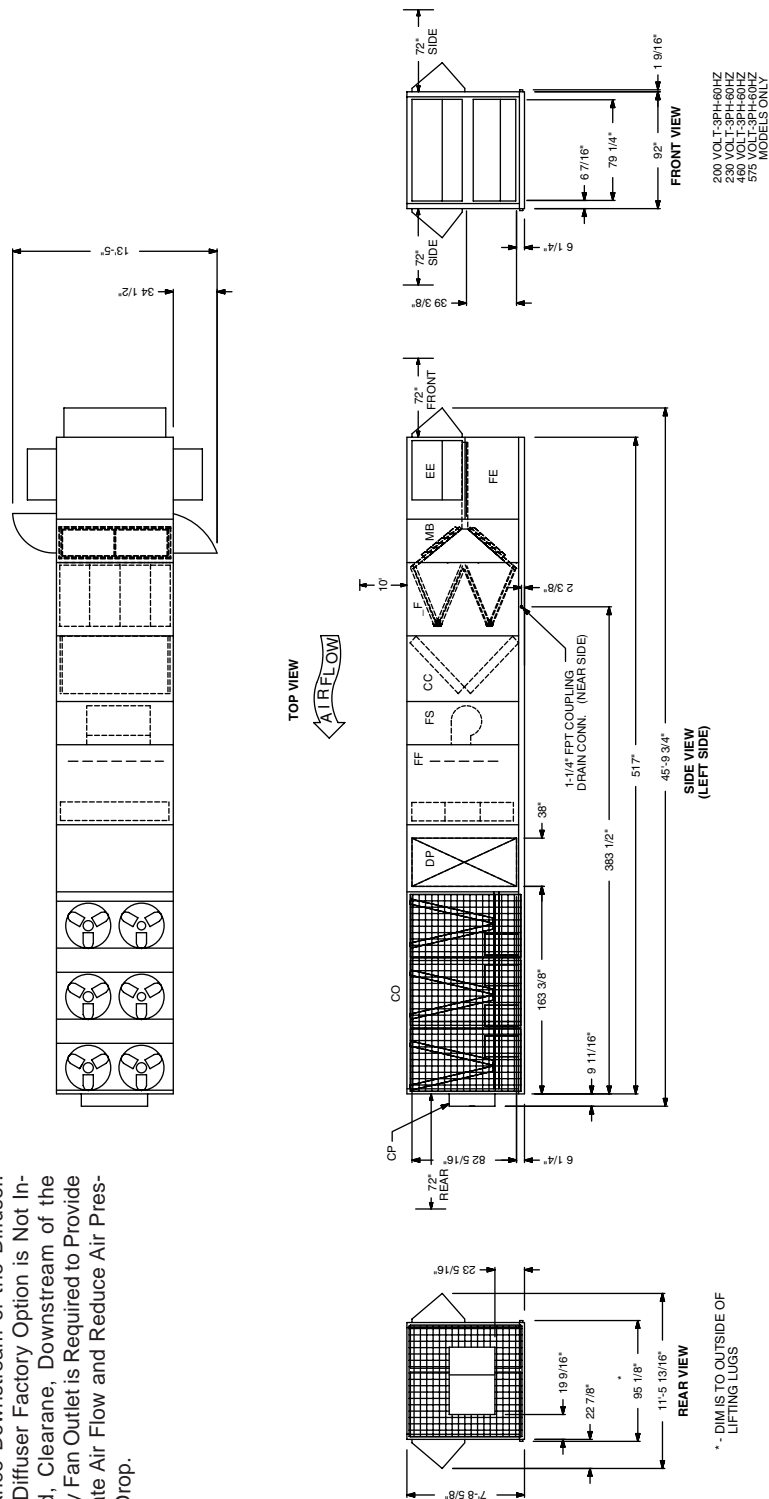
GENERAL ARRANGEMENT DRAWING
